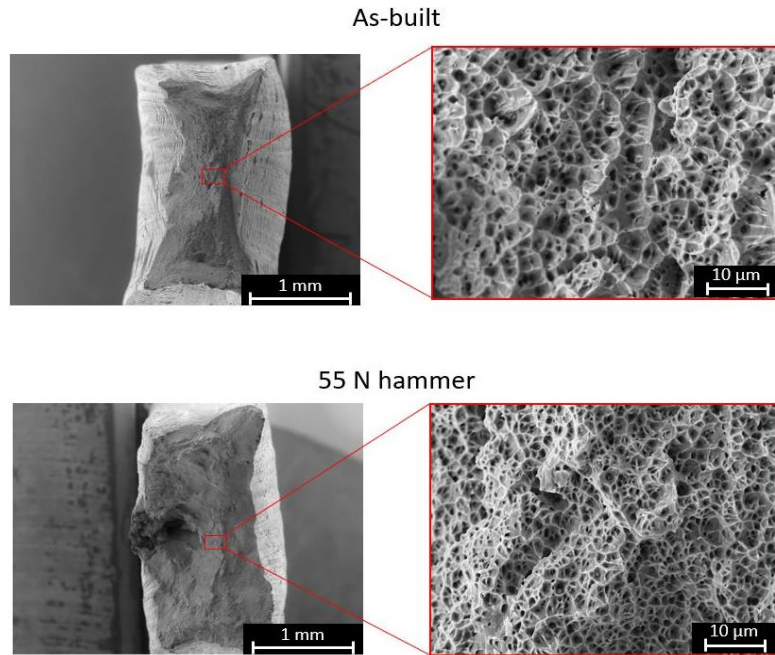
Fracture surface from uniaxial tensile test specimen for the as-built and 55 N hammer hammer
